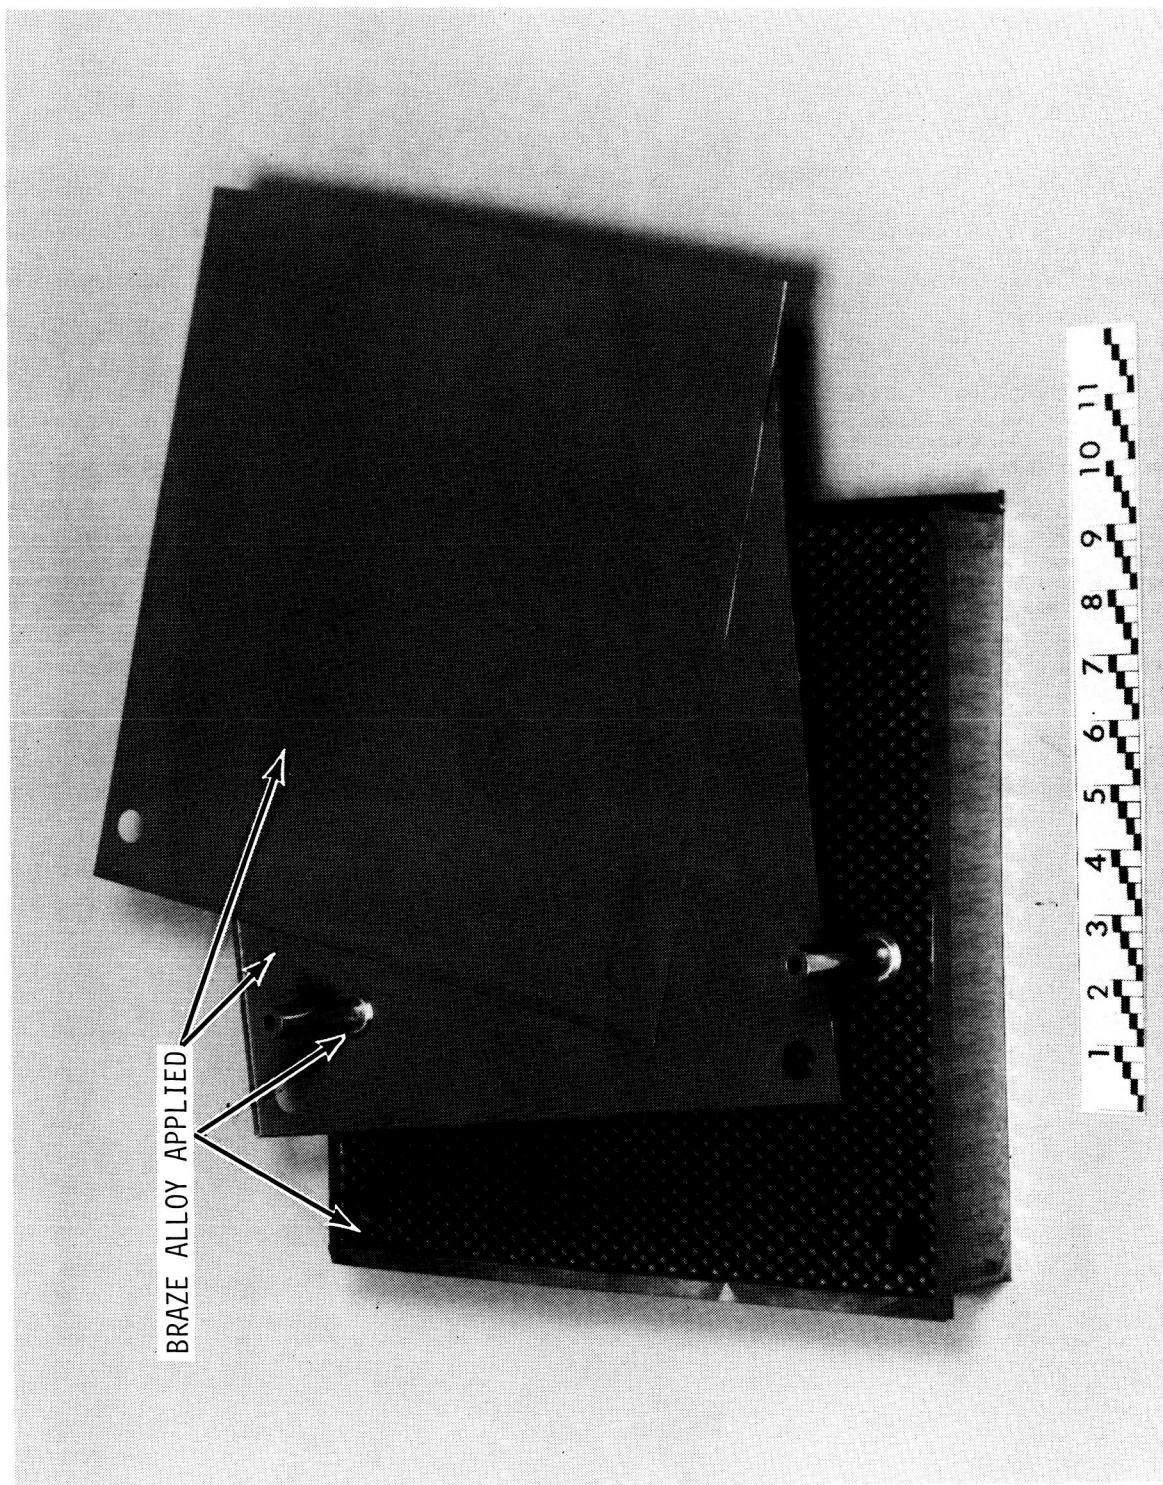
6061 Aluminum Form Block With Removable Details and Tool Proof Parts
